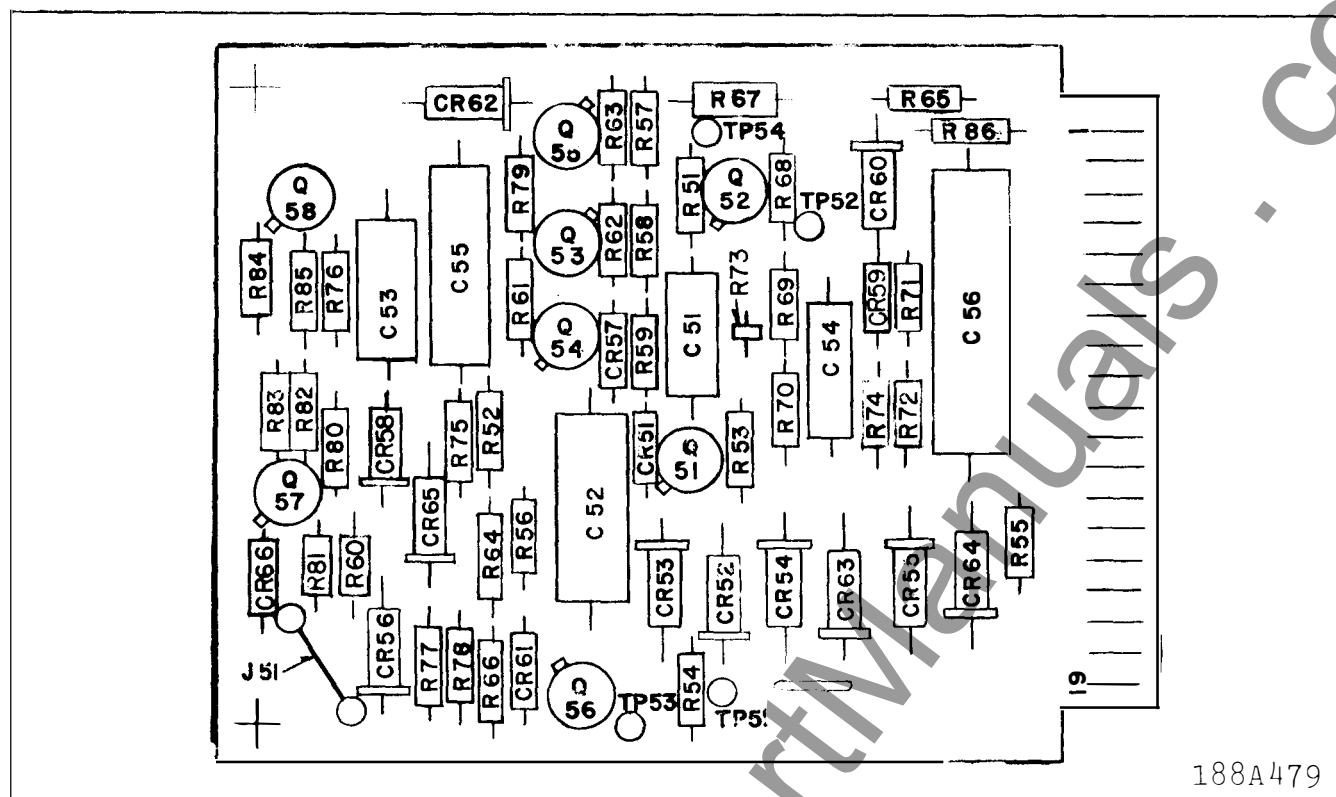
Component Location on Left-Hand (rear view) Printed Circuit Board in Type TCU Control Unit.
